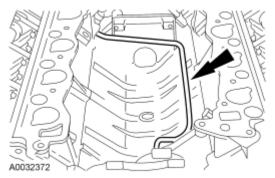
Coolant Bypass Tube Courtesy of FORD MOTOR CO.
